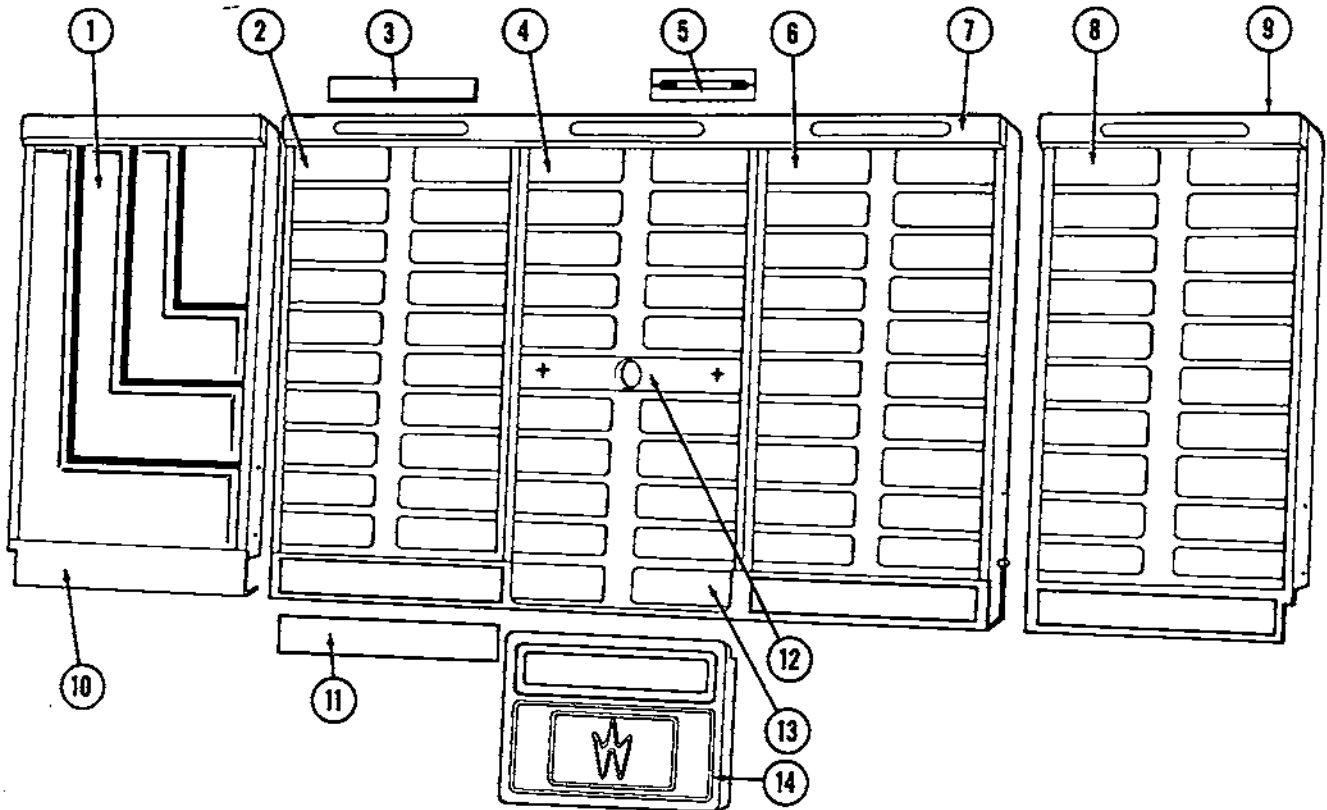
PROGRAM HOLDER AND FRAME ASSEMBLY
